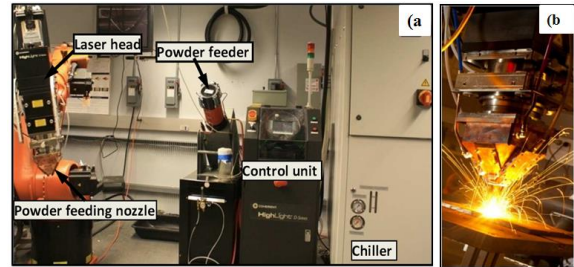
(a) Experimental setup for laser cladding process, (b) Laser head and powder nozzle system.
